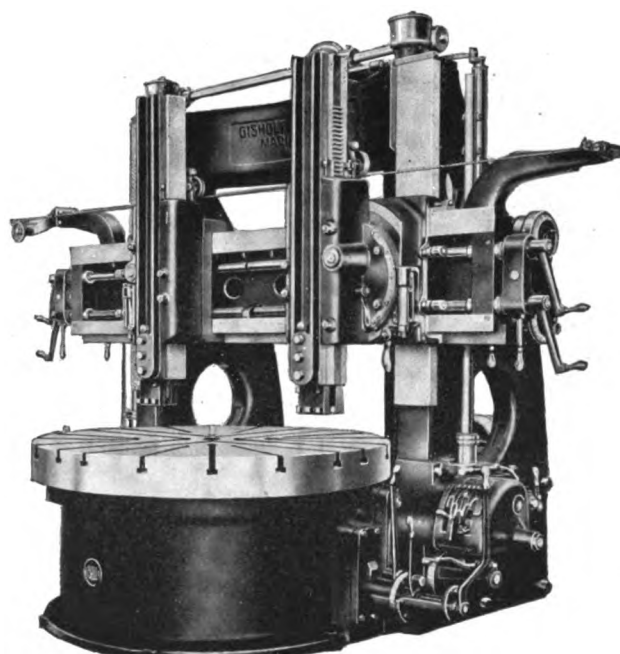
Gisholt Double-Head Vertical Boring Mill
